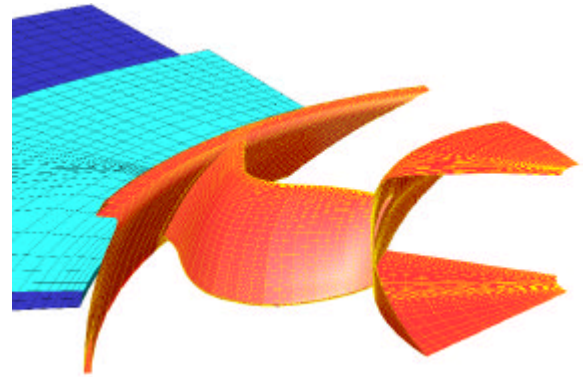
A close-up view of the fan hub, blade, shroud, and plate
